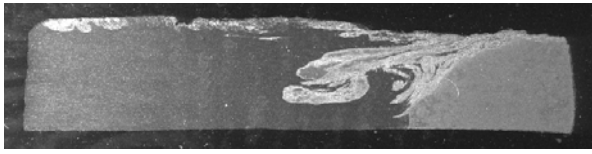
(a): Macrograph of weld produced at 950 rpm and 50 mm/min
